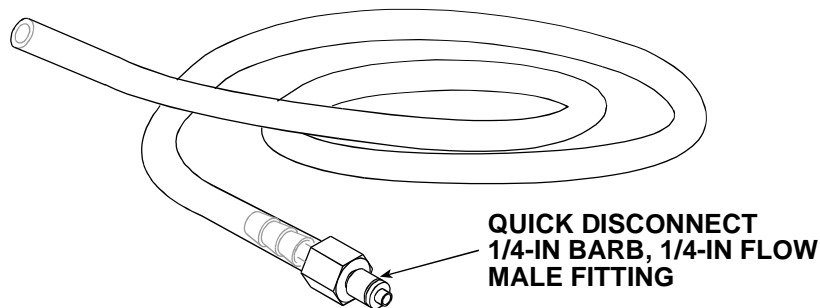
Ink Pump Supply Tubing Assembly (9600-074)
